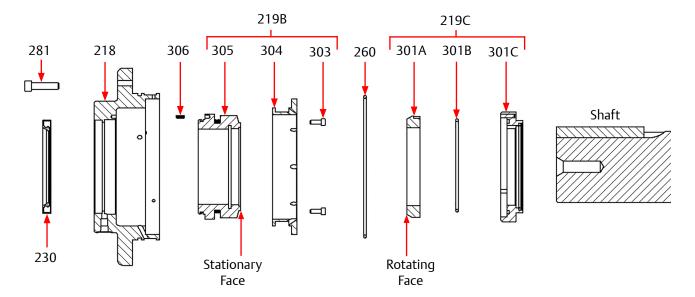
Shaft Seal Breakdown (25985W Only)
